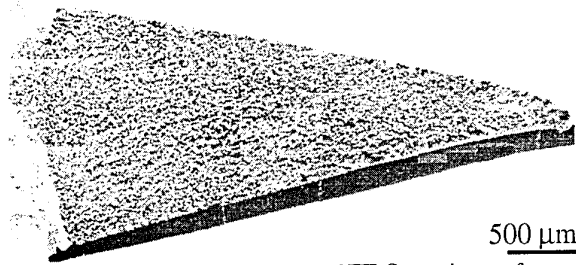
b : Fracture surface of FT-S specimen after 7500 cycles of thermal-fatigue.
